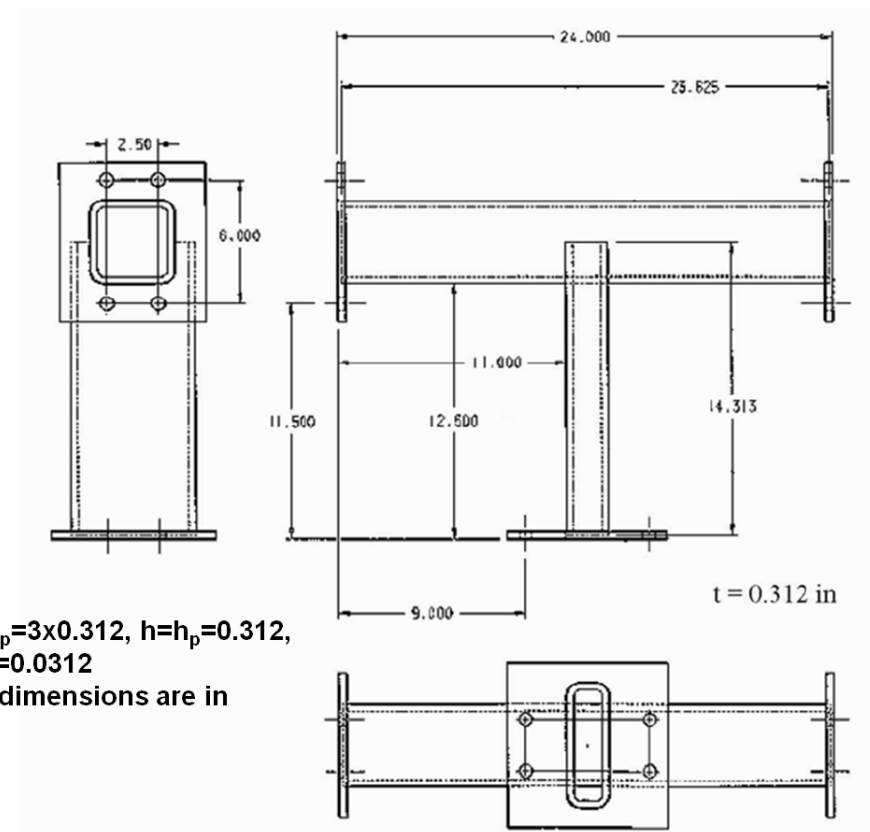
Geometry and dimensions of the considered tubular weldment
